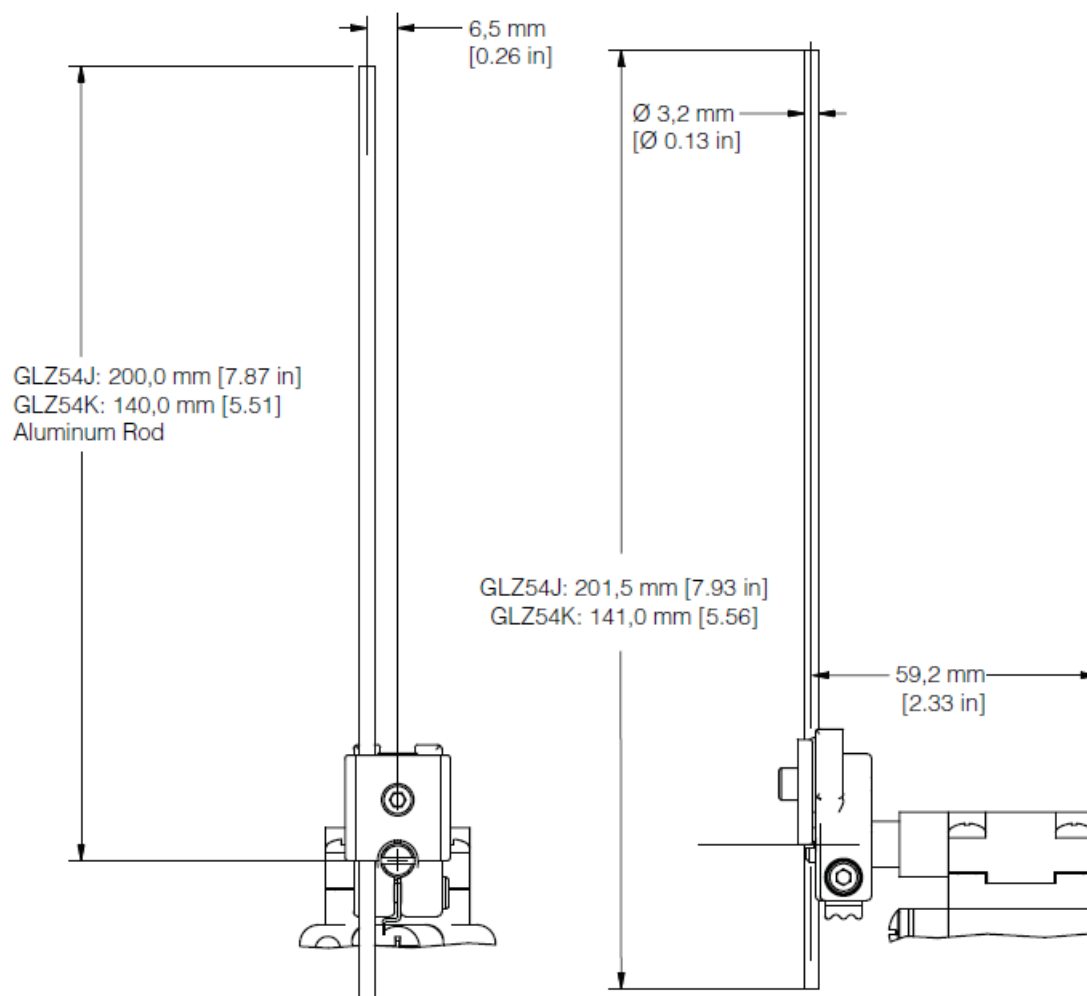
Aluminum Rod Lever Dimensions, GLZ54
